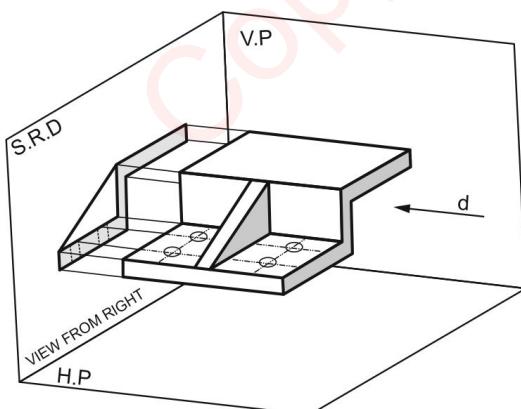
Pictorial drawing showing view from right of the clamping fixture
